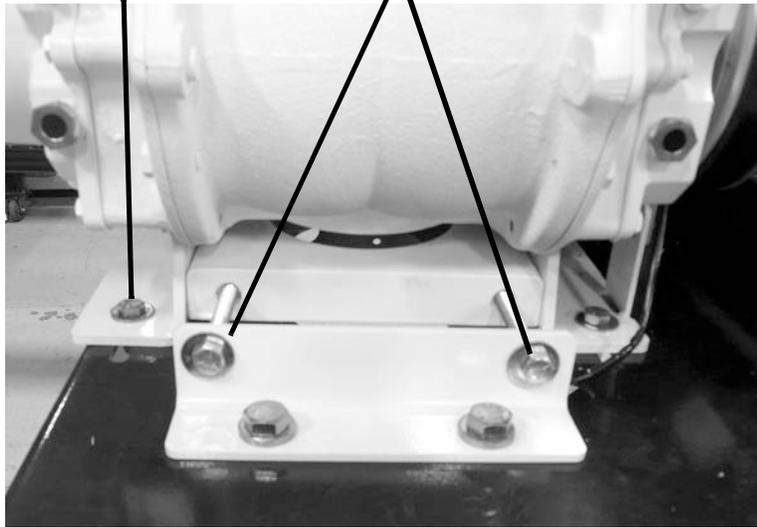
Use the tension screws on the blower mounting plate to loosen and tighten the blower belts.
